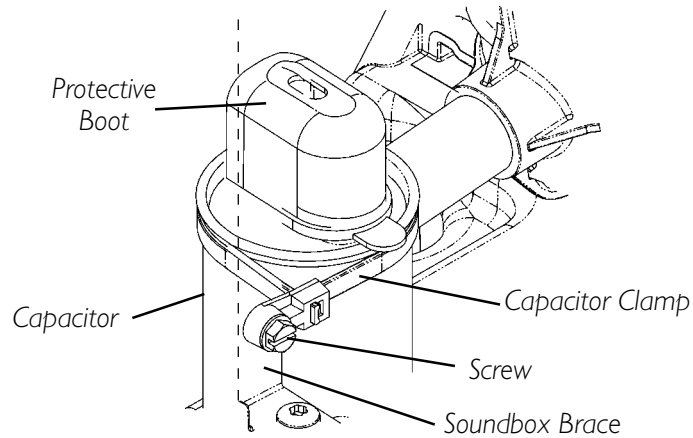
REPLACING COMPRESSOR ASSEMBLY
